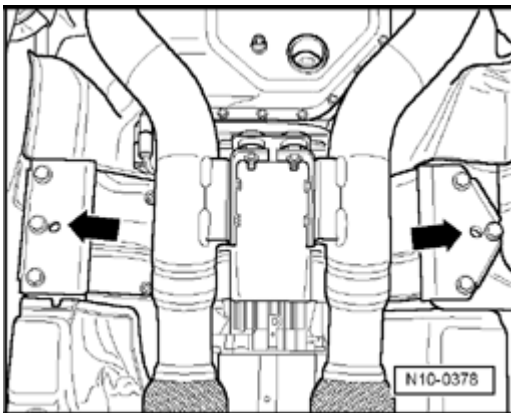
Guiding Rear Transmission Mount Supports Into Holes
